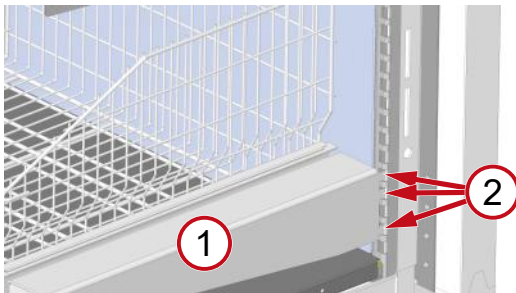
Attach bracket (1) – opening in rear panel (2)
